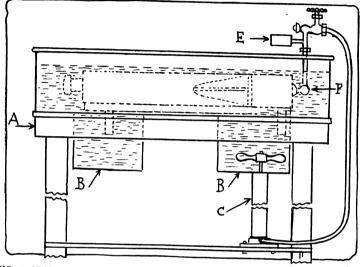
SECTION OF RADIATOR TESTING TANK, SHOWING CONSTRUCTION AND AIR PRESSURE CONNECTIONS
